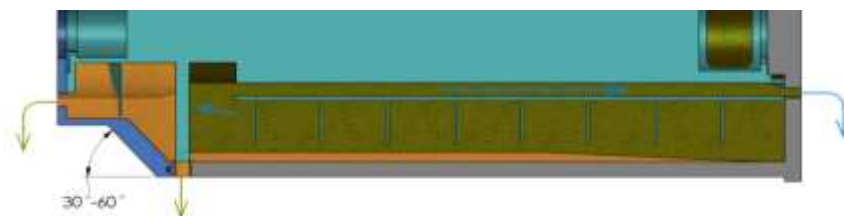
A quarter section of the Humboldt (an existing company that sold off their centrifuge line) Type B centrifuge rotating assembly. This design implemented a steeper cone angle than had ever before been believed feasible. This design also used a version of the hydraulic assist but also implemented a solids discharge port on the outer wall of the bowl at the cone-baffle interface. Image courtesy of Centrisys Corporation, Kenosha, WI
